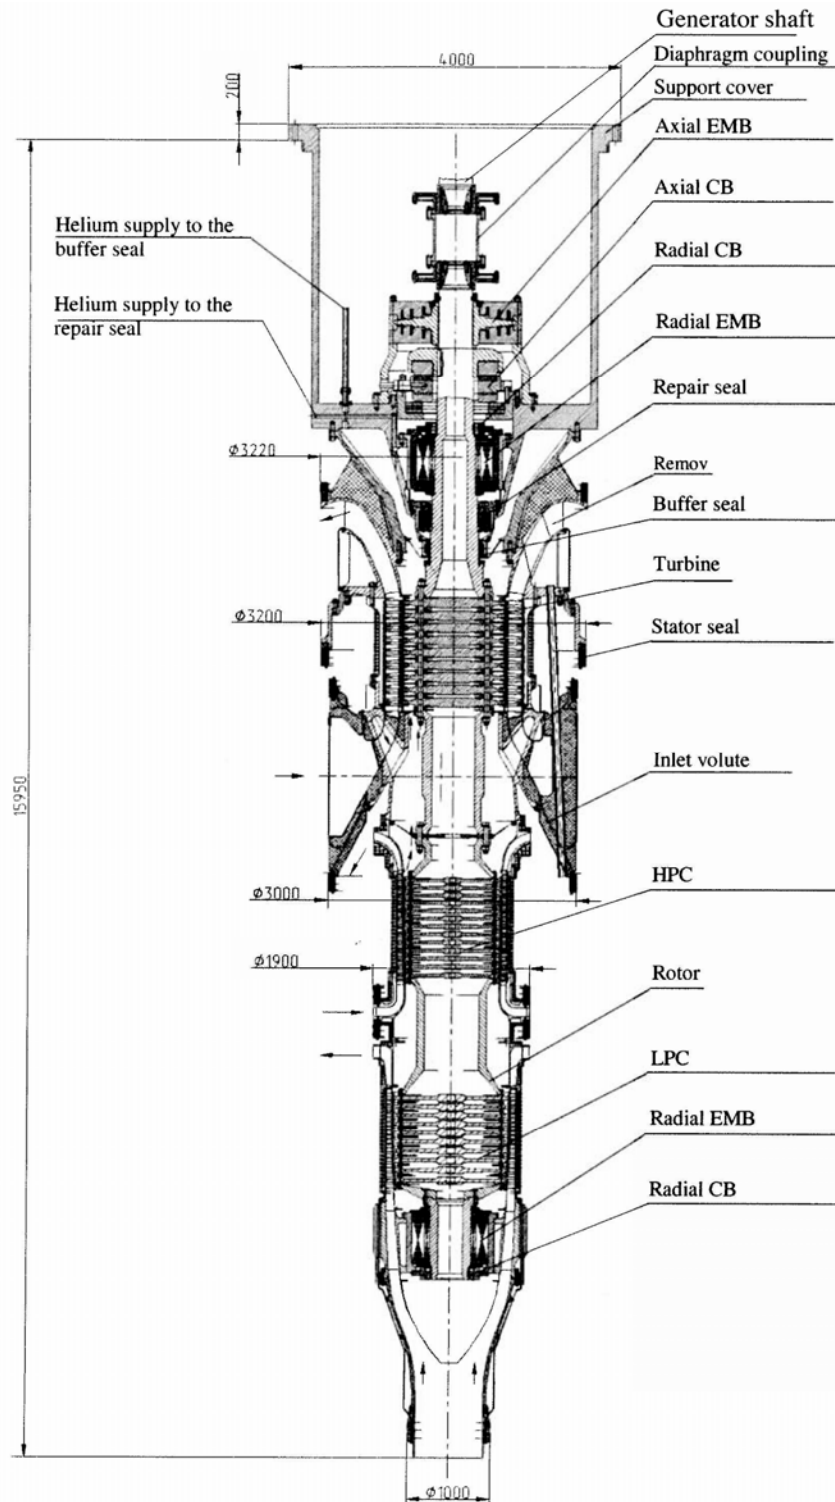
Turbocompressor (dimensions shown in millimeters)
